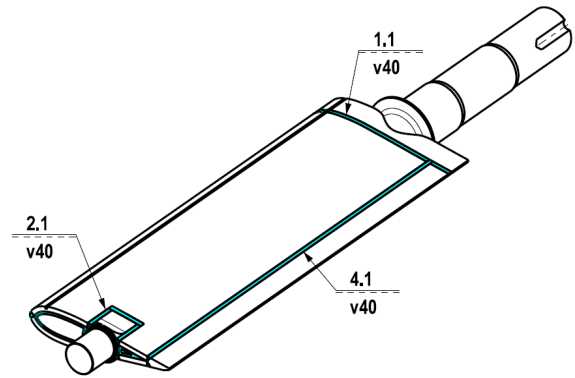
Appearance of a guide vane apparatus vane with marked V40 welded joints
